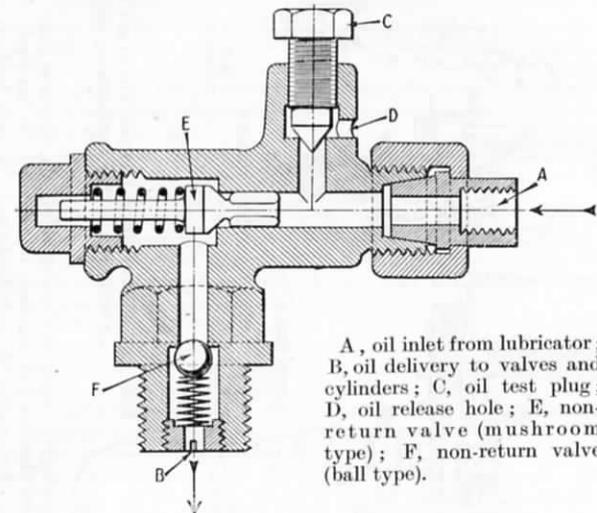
COMBINED CHECK AND TEST VALVE FOR WAKEFIELD MECHANICAL LUBRICATORS.
